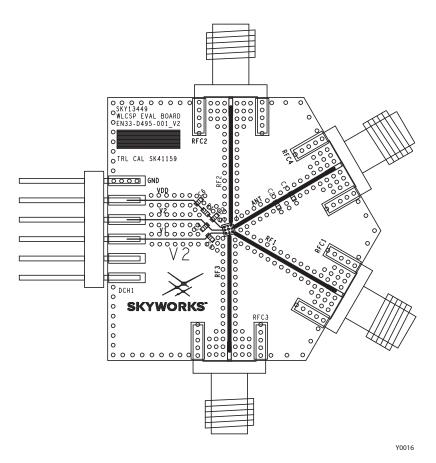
SKY13449-001 Evaluation Board Assembly Diagram
